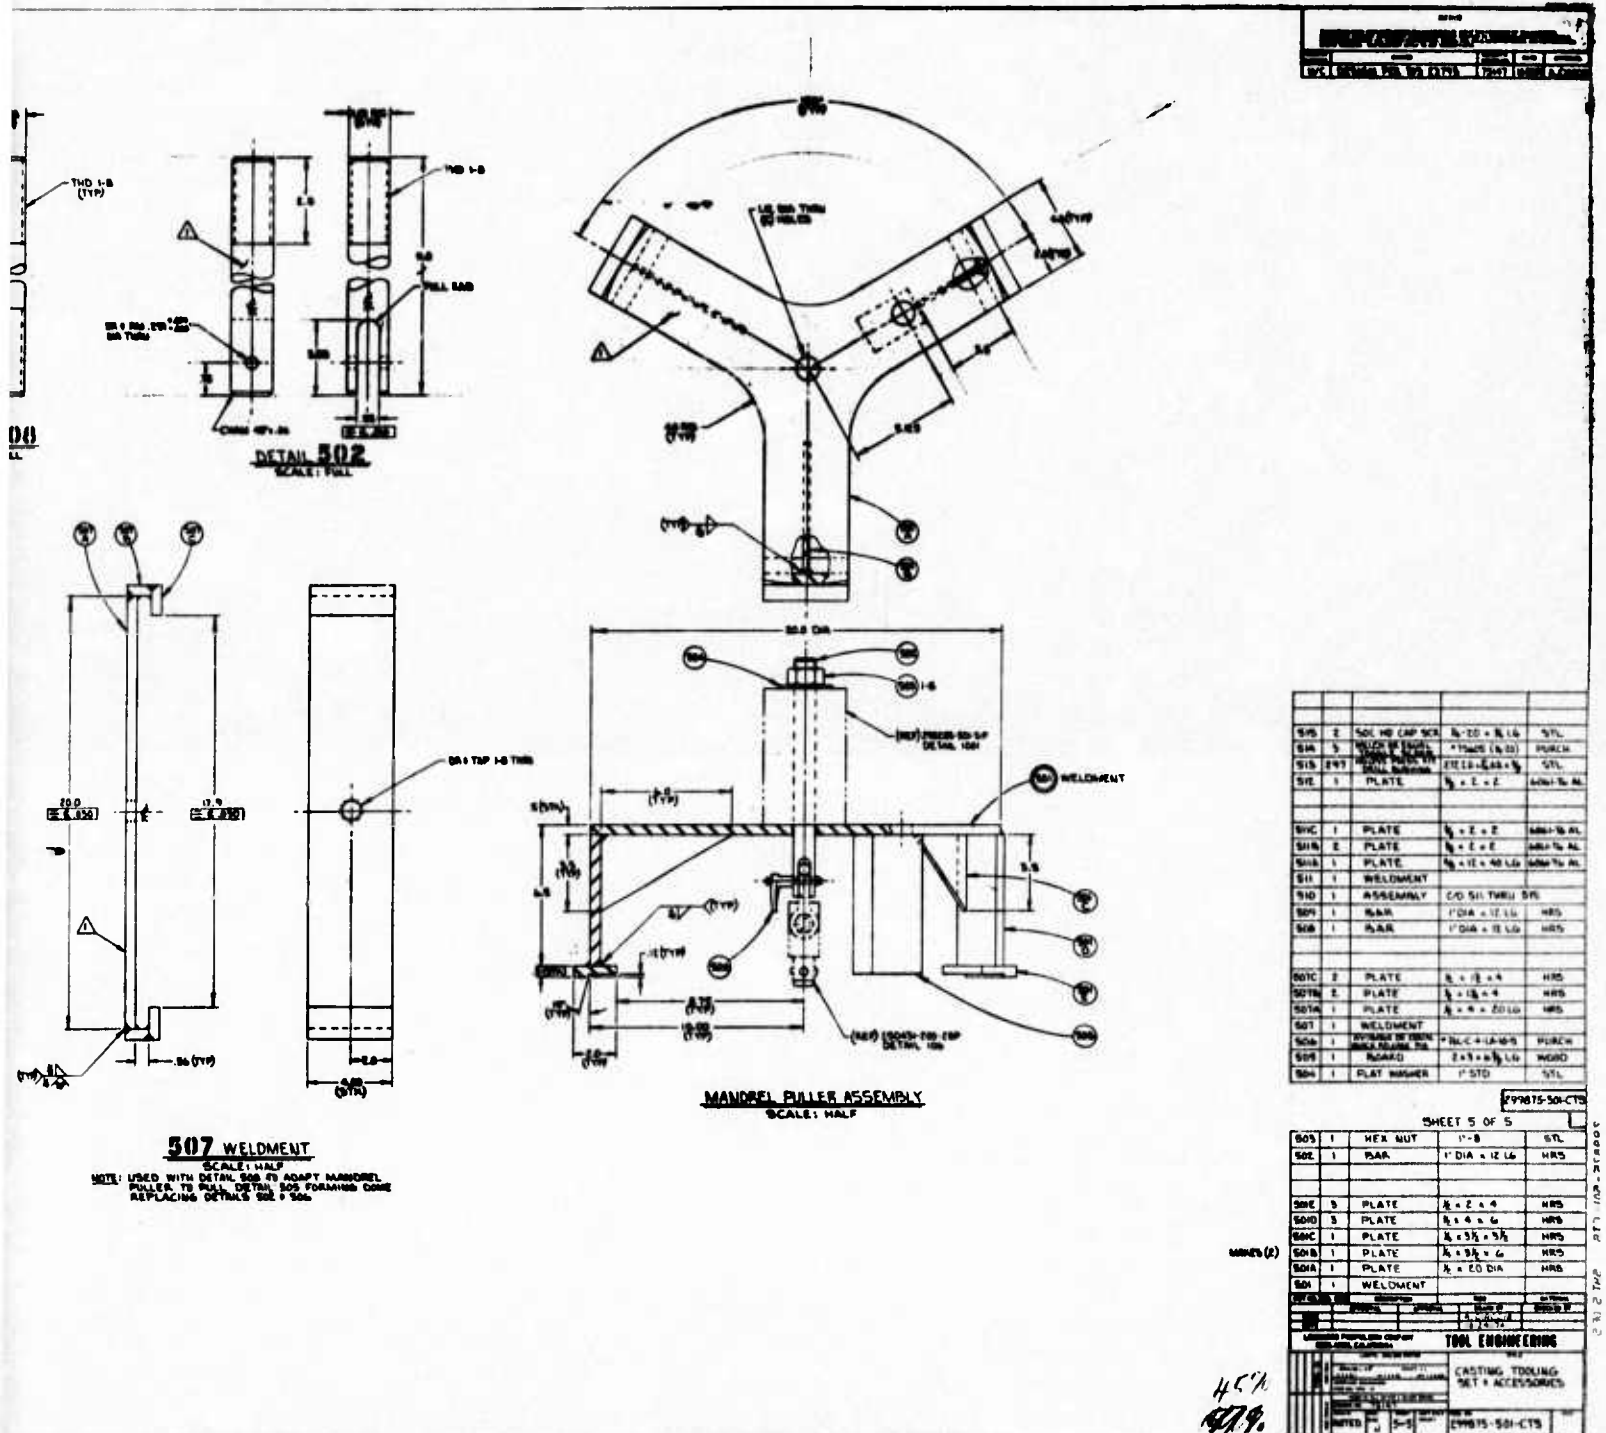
Casting Tooling Set and Accessories Sheet 5 of 5
